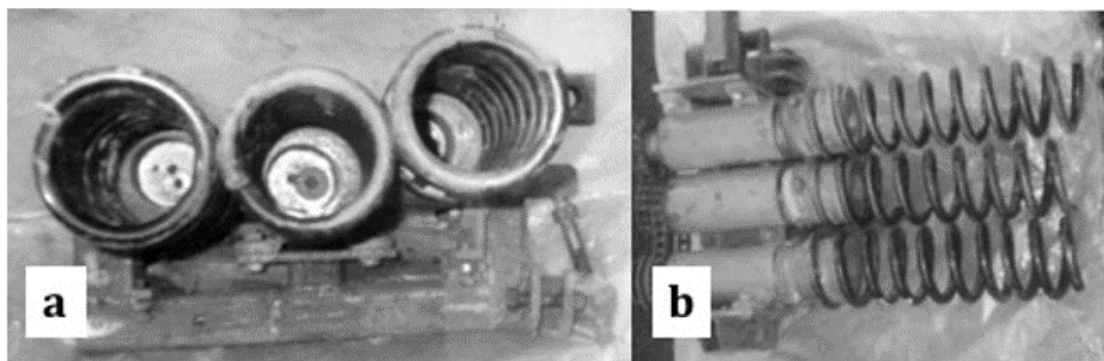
Spiral rollers for cleaning relevant to the potato heaps separator: a) side view; b) top view.
